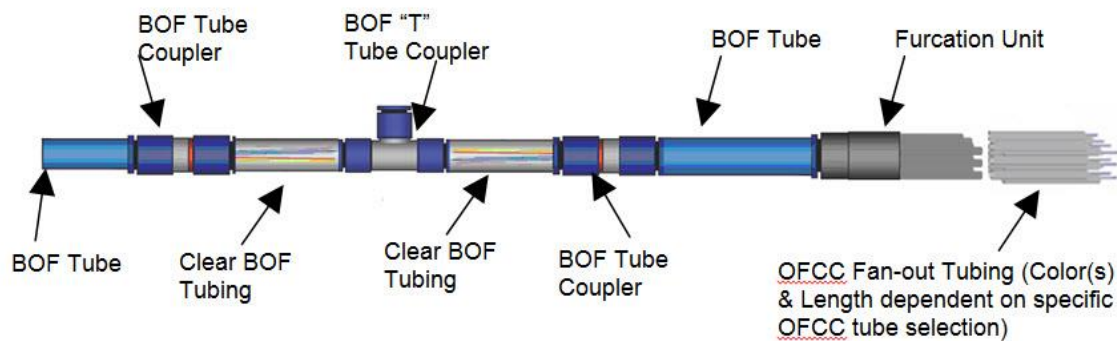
F3-10. Attachment of furcation unit to tee tube coupler assembly.
